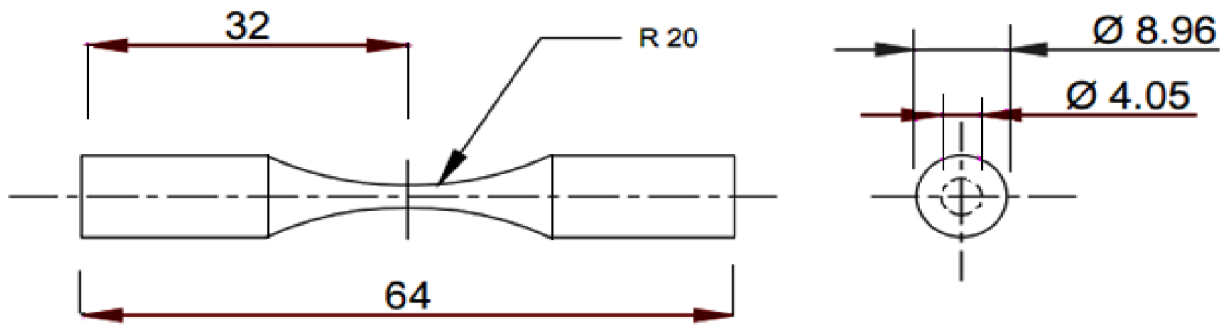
Dimensions of specimen for fatigue strength test (mm) [132].
